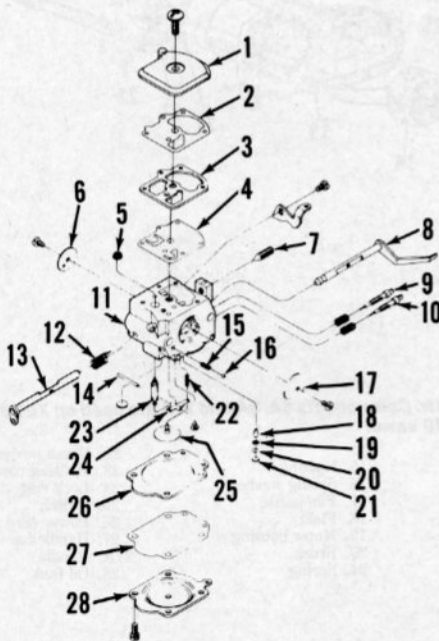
Exploded view of Zama C2S carburetor used on later XL models.
